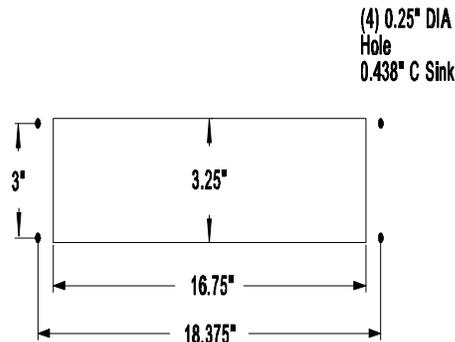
Panel Mounting Detail For Rack Mount Enclosure
